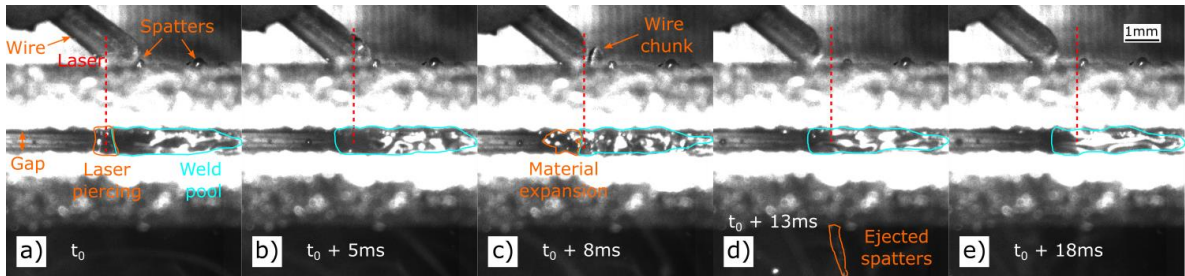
High-speed images of AISI30LN welding with 1 mm gap – side view. a) in its most advanced position, the laser pierces through the upper sheet b) then encounters the wire and reduces penetration; c) when wire is completely molten, a rush of material expands in the gap; d) subsequently, when laser gets to rear position, a jet of material is blown out of lower surface; e) pool stabilizes
